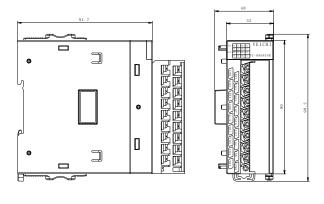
I/O expansion module external dimensions and mounting hole dimensions (unit: mm)
